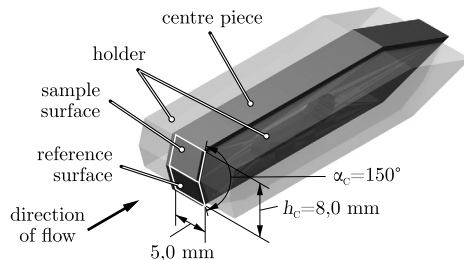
Sketch of the wedge shaped test body used in this study, ■: centre piece, ■: holder.
